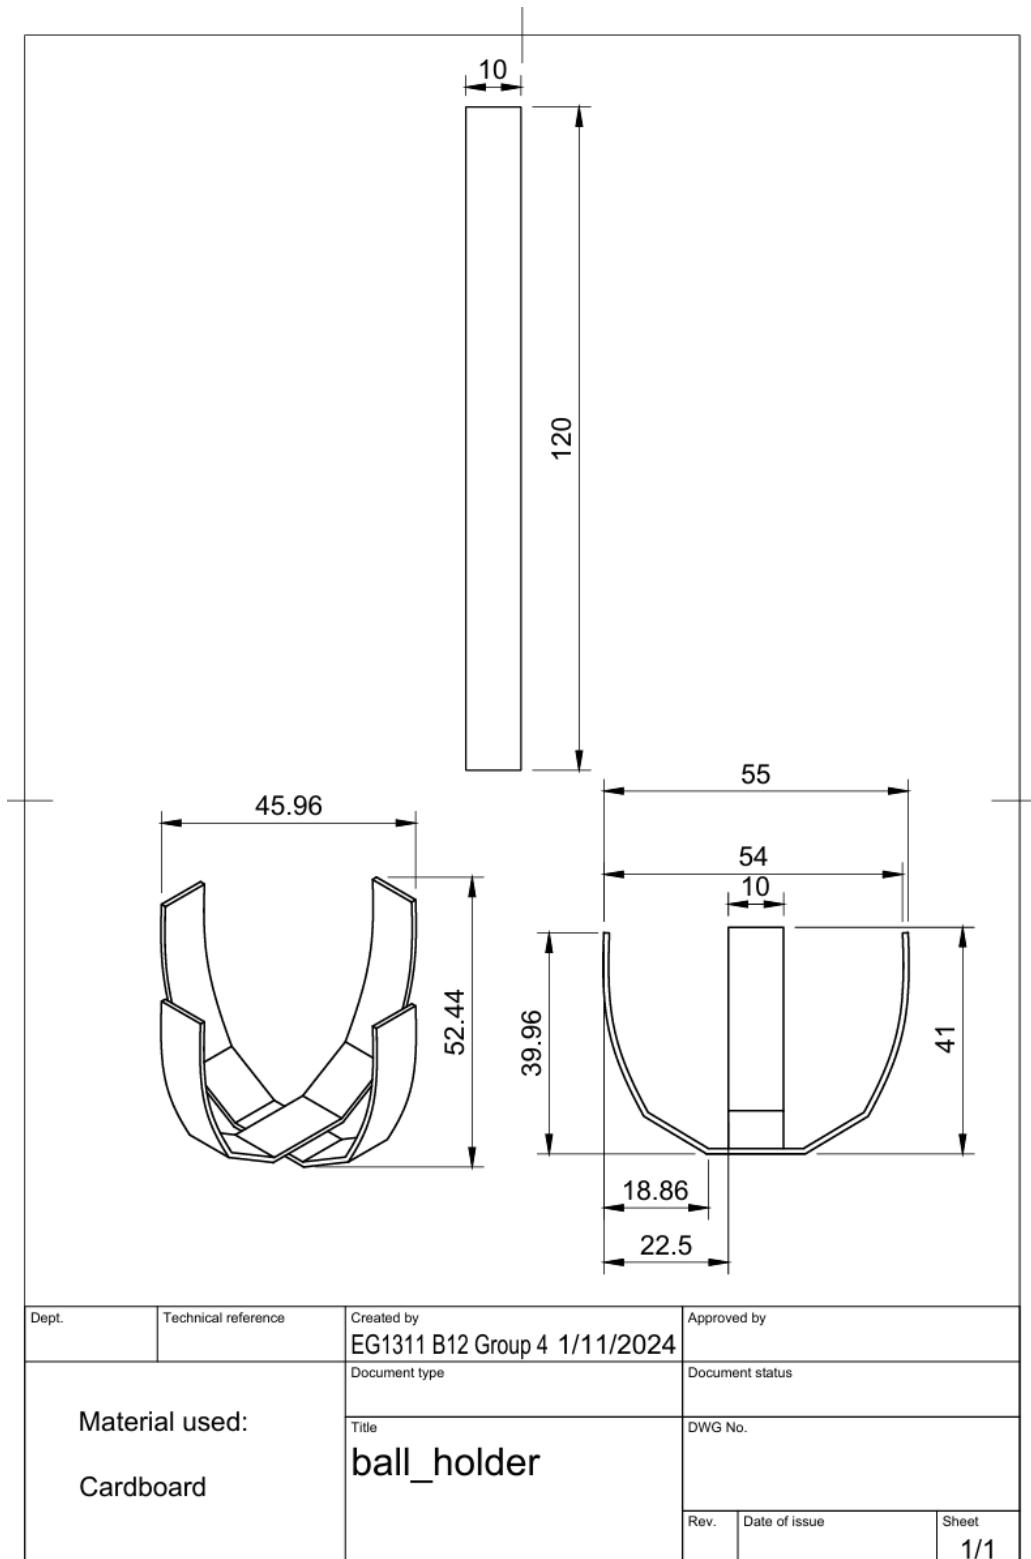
2D CAD Drawing Dimensions of Ball Holder
